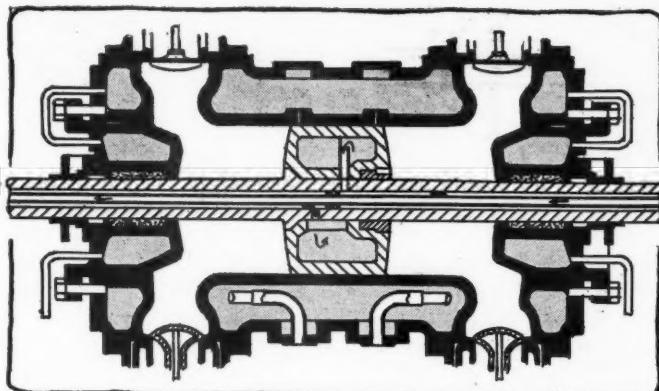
Double acting piston used on large gas engines. The piston and stuffing boxes are water cooled
